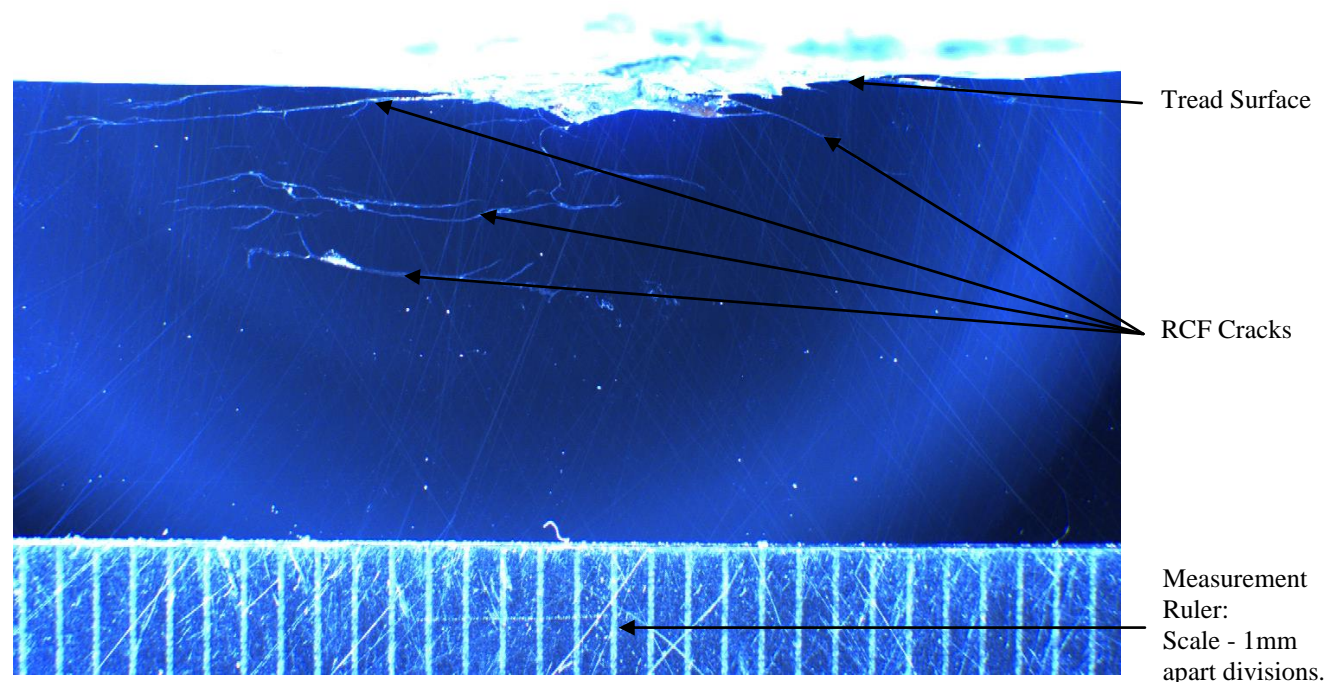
Image of as-polished sectioned HSR1 wheel sample showing sub-surface cracking in the railway wheel HSR1 at the position of maximum run-out.
